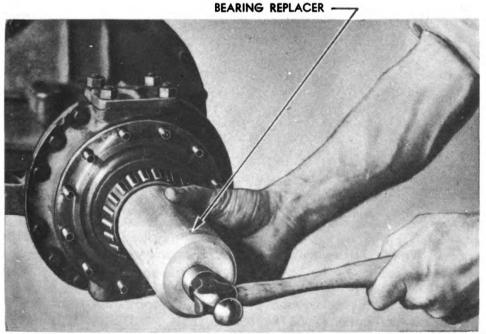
Installing Front Wheel Inner Bearing Oil Seal (6 x 6)
